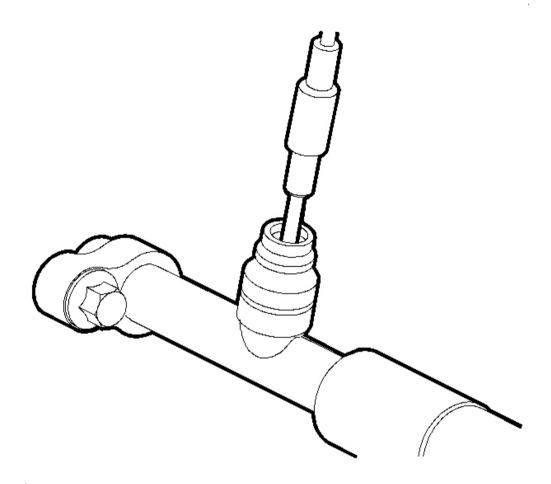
Equivalent & Valve Core Courtesy of GENERAL MOTORS CORP.
